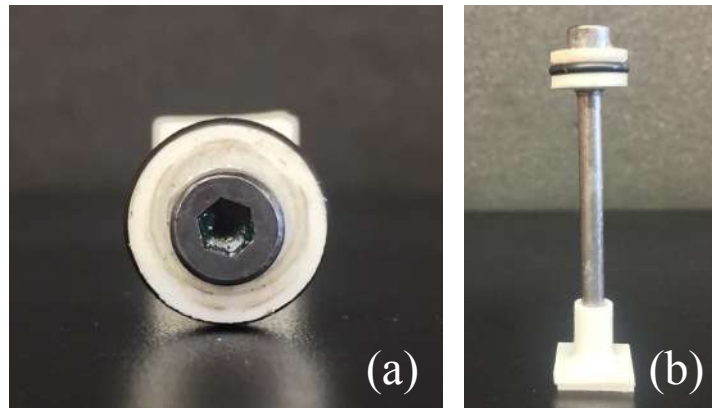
Images of the Selected O-ring Design, Implemented with the Piston Head Fabricated Design
